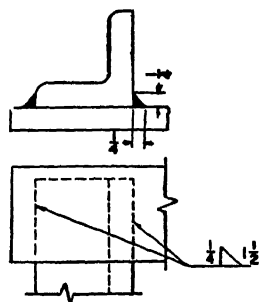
Structural Angle Fillet Welded to Plate.
